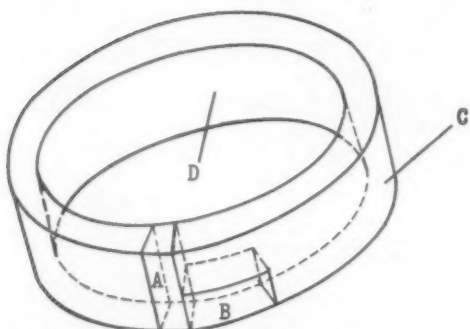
VIEW OF TYPE OF CASTING USED FOR TESTS. A—SECTION OF RING USED FOR VERTICAL TEST BAR. B—SECTION OF RING USED FOR HORIZONTAL TEST BAR. C—SECTION DRILLED FOR CHEMICAL ANALYSIS OF OUTSIDE SURFACE. D—SECTION DRILLED FOR CHEMICAL ANALYSIS OF INSIDE SURFACE.
